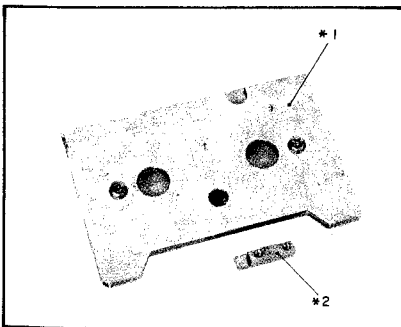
Check base plate jig (*1) and guide height check jig (*2)
